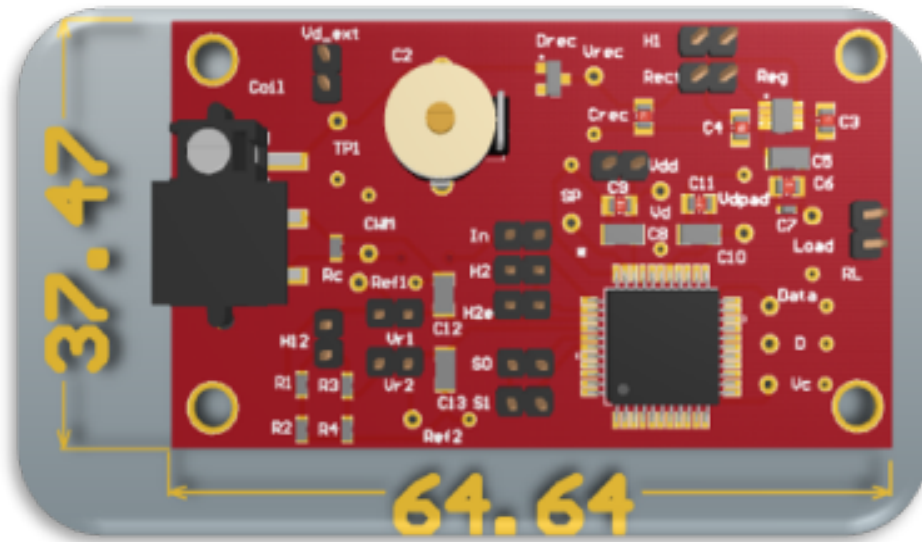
3D top view of the receiver circuit board. The dimensions are in millimeters
